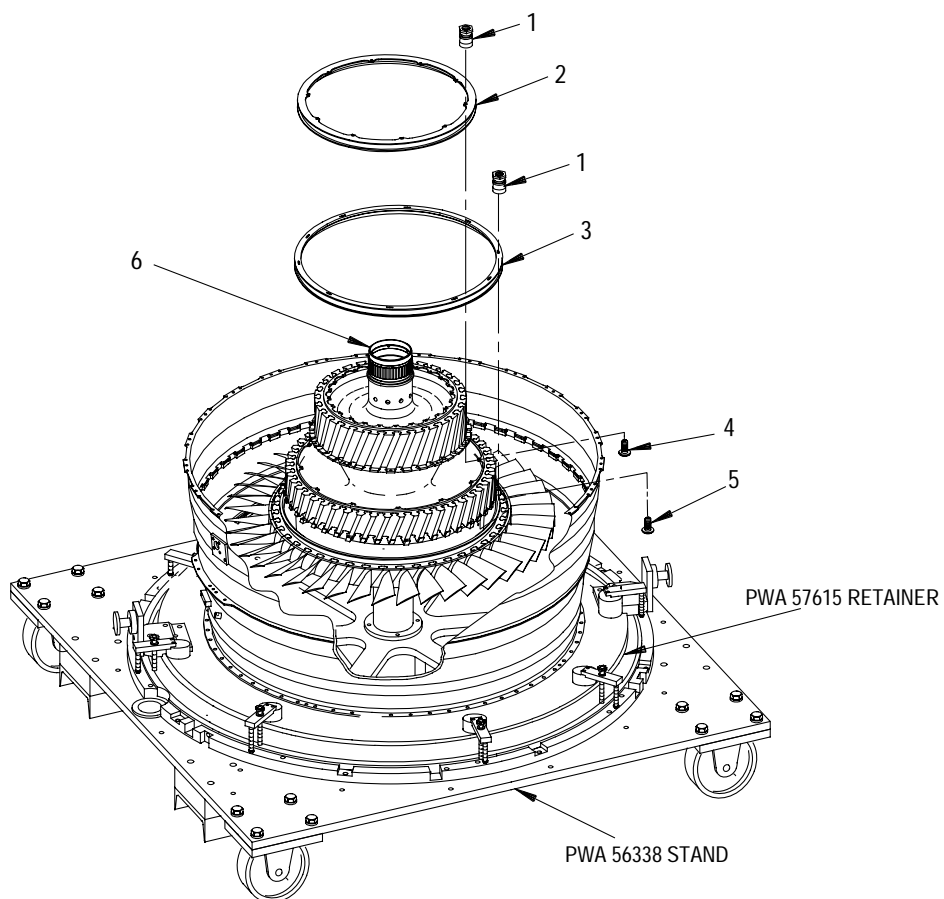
Drum Rotor Assembly - Installation Onto PWA 57615 Rear Retainer and PWA 56338 Stand
